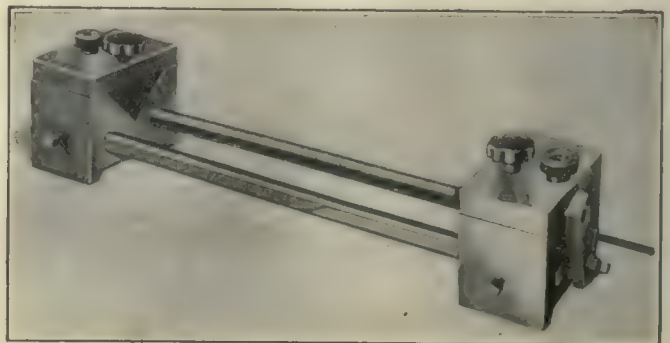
ADJUSTABLE DRILLING JIG FOR COTTER-PIN HOLES
